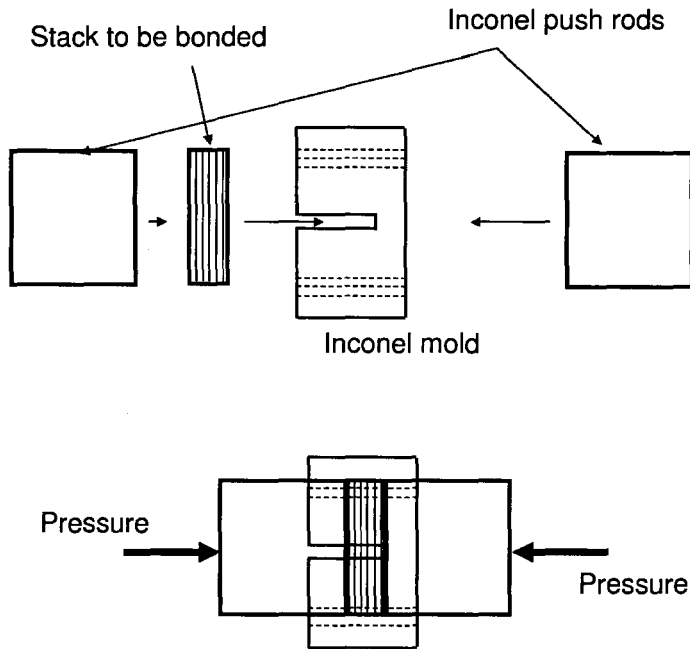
Assembling of the pushrod, the stack of drilled/undrilled sheets and the mold.
